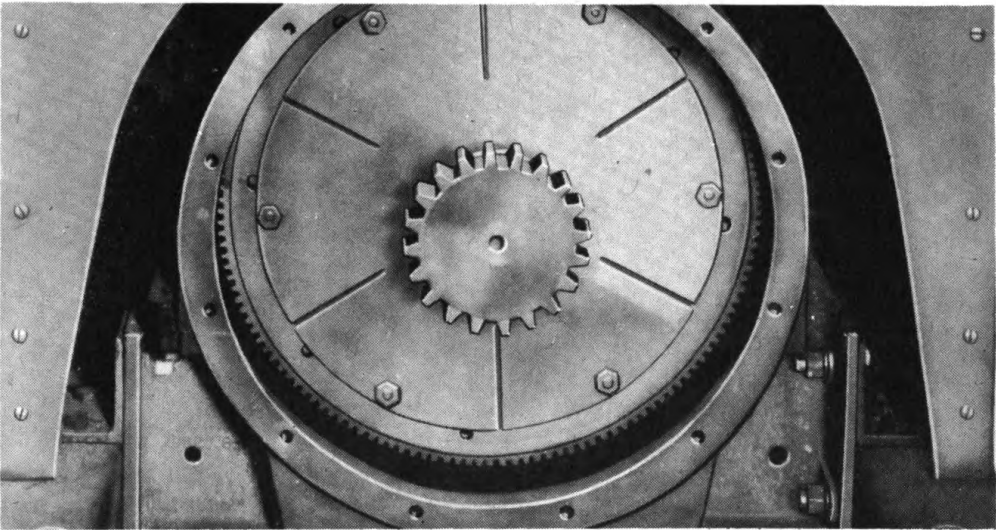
C—Engine Pinion Mounted on Shaft of Drive Disc
